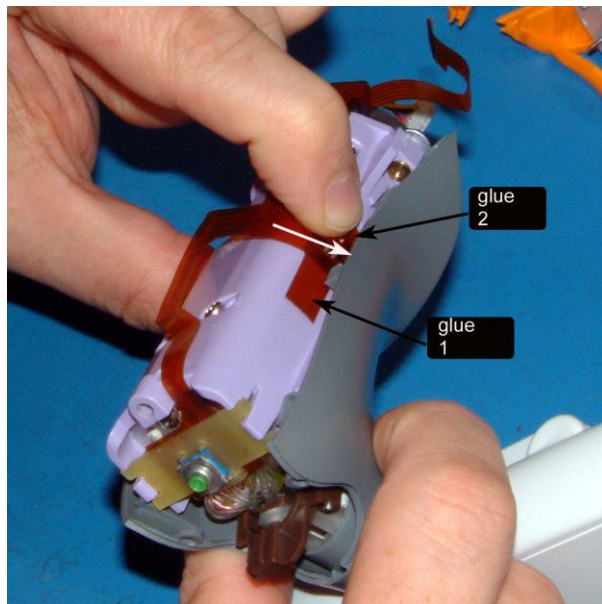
Pushing Sensor toward Front of unit while glue hardens
